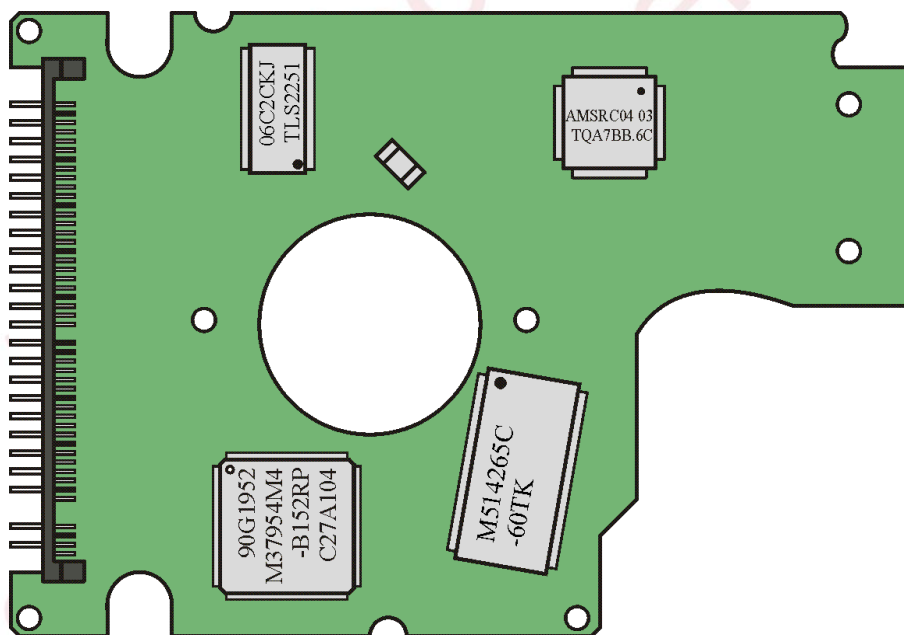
External view of the controller board in 12GN, DARA drive family.
